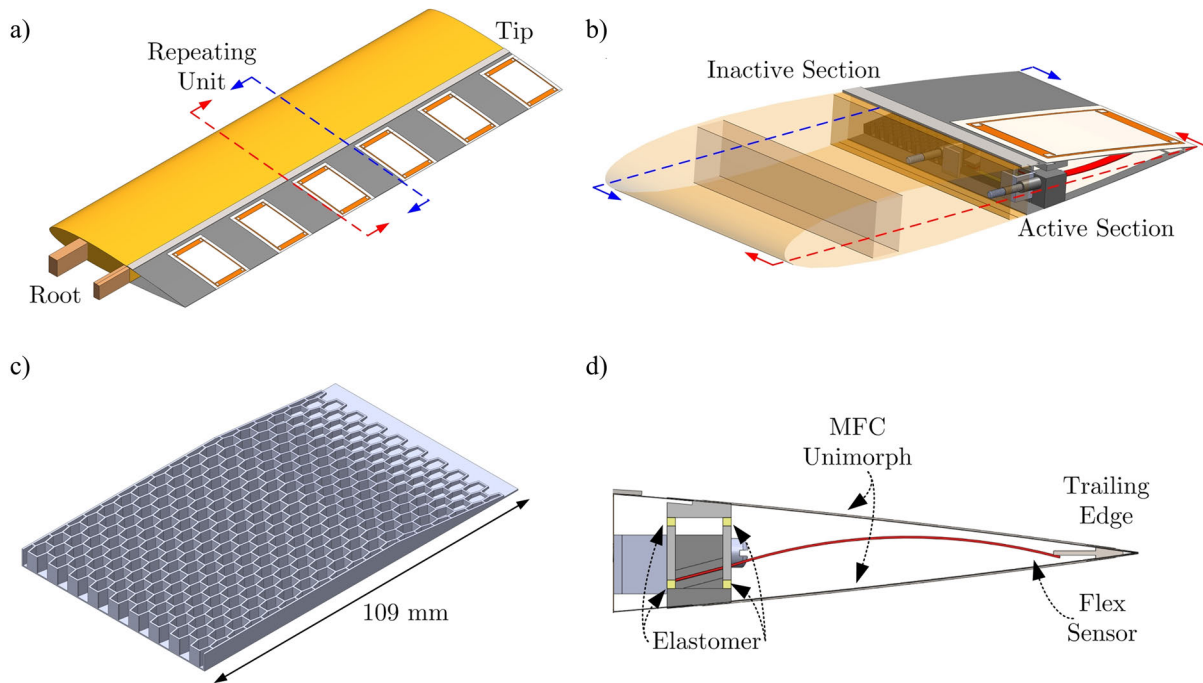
Diagram of a) SMTE full isometric view b) repeated section isometric view c) inactive honeycomb d) cross-sectional view of the active trailing edge components
